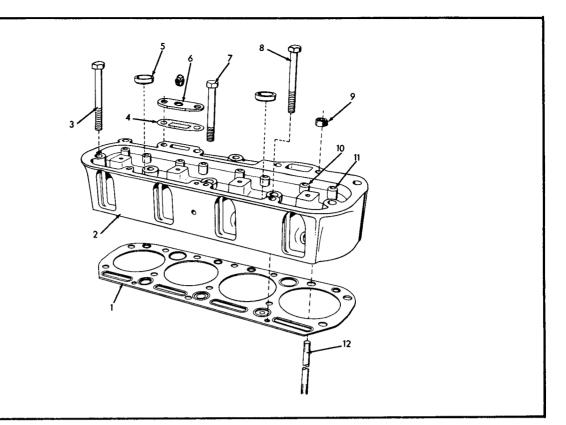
CYLINDER HEAD – USED PRIOR ENGINE #289000
